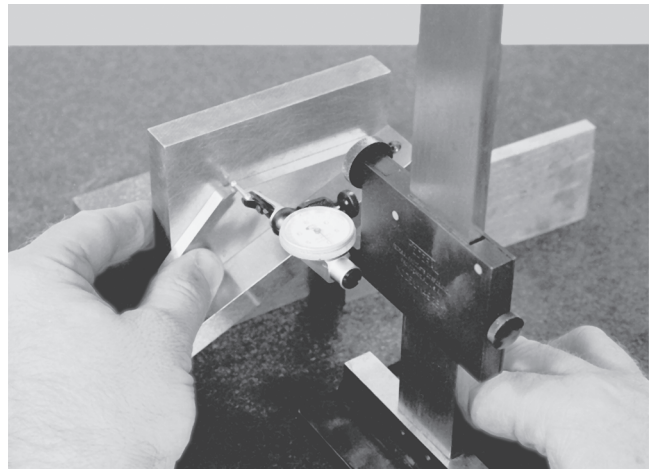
Checking the zero reading at the opposite end of the workpiece.
